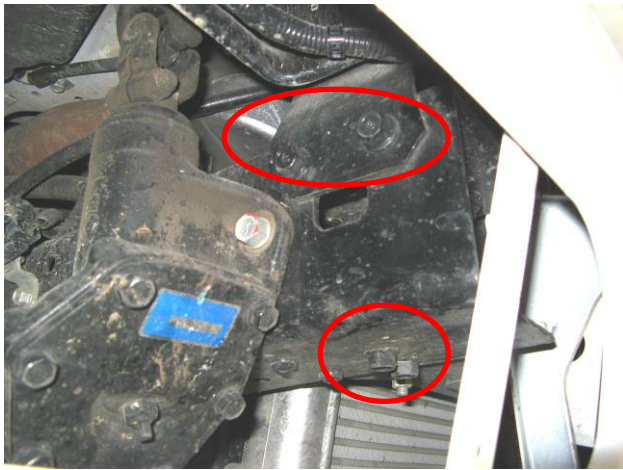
Drivers side 14mm bolts to be removed for fitment.
